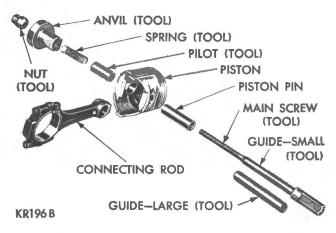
Tool arrangement for installing piston pin (Tool CA-3724).
